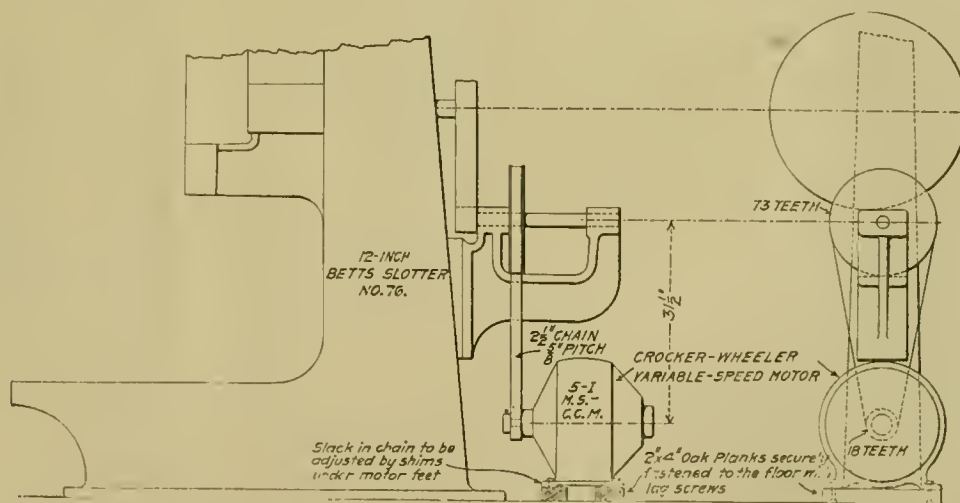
DETAILS OF THE MOTOR-DRIVE APPLICATION TO THE 12-IN. BETTS SLOTTOR.
